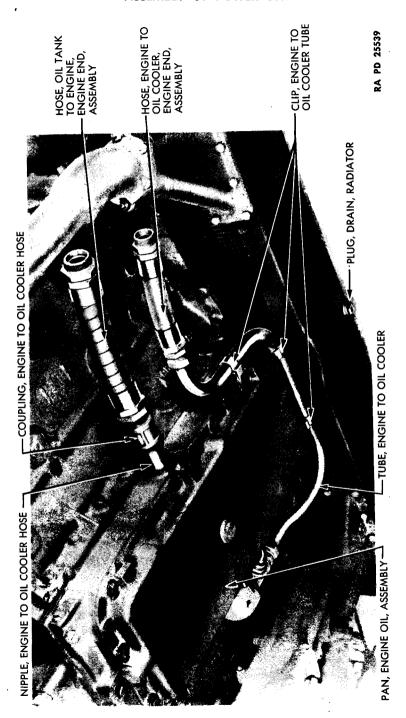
Power Unit Oil Tubes, Bottom And Right Side
